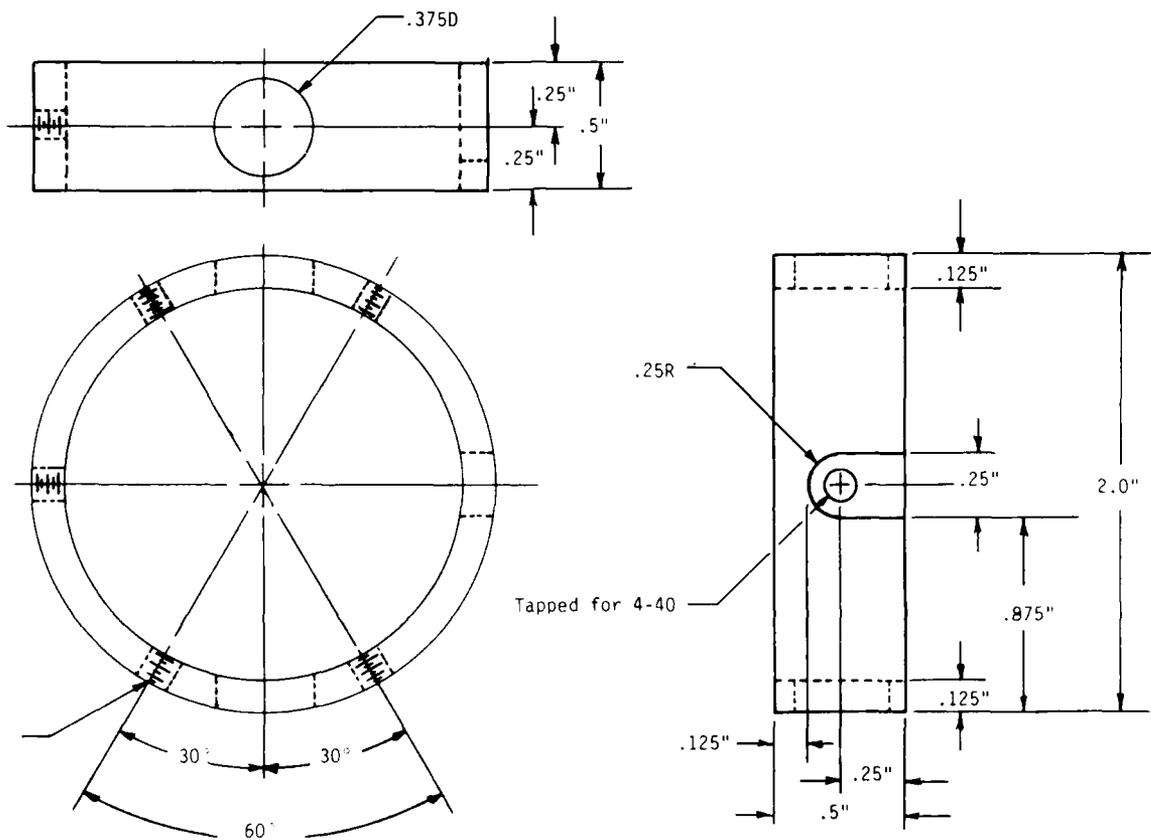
Chopper motor mounting ring; unless otherwise specified, tolerances are  $\pm .002$
